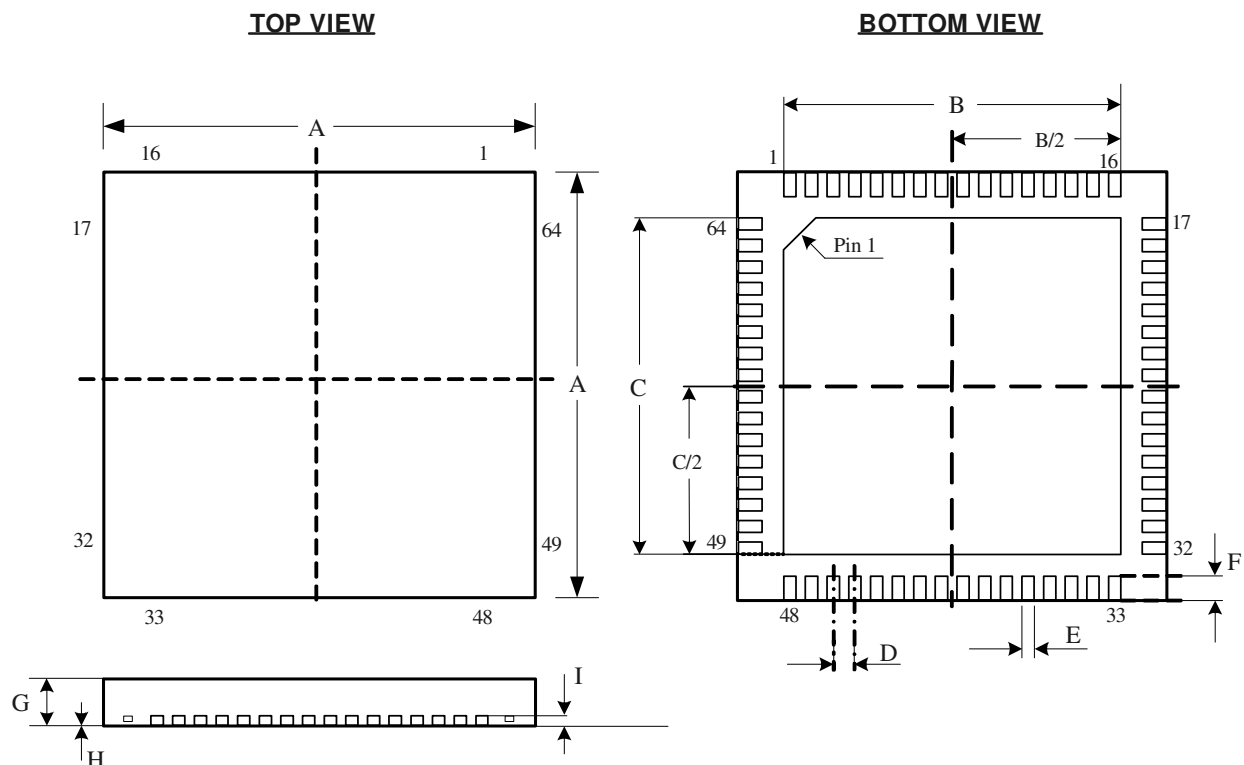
64 Pin QFN Package (8 x 8 x 0.8mm)
